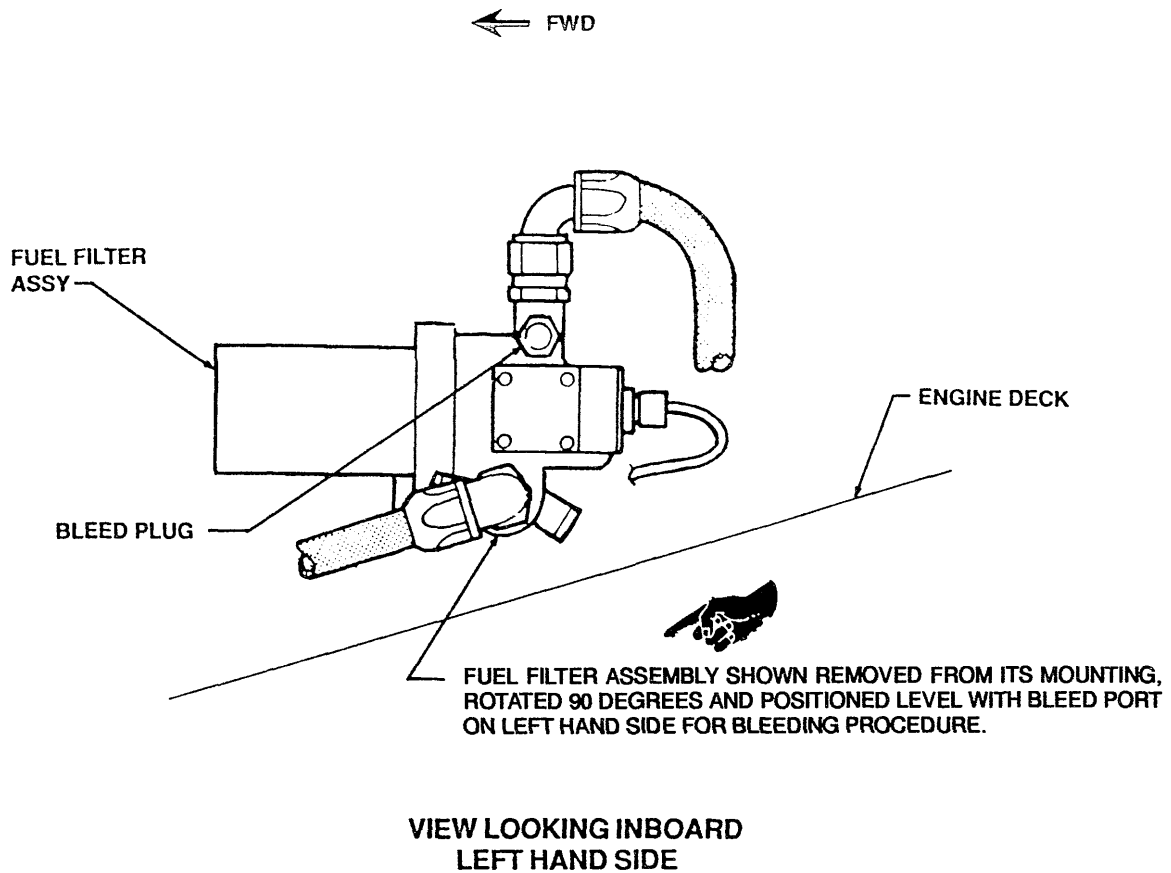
Bleeding Airframe Fuel Filter Assembly
